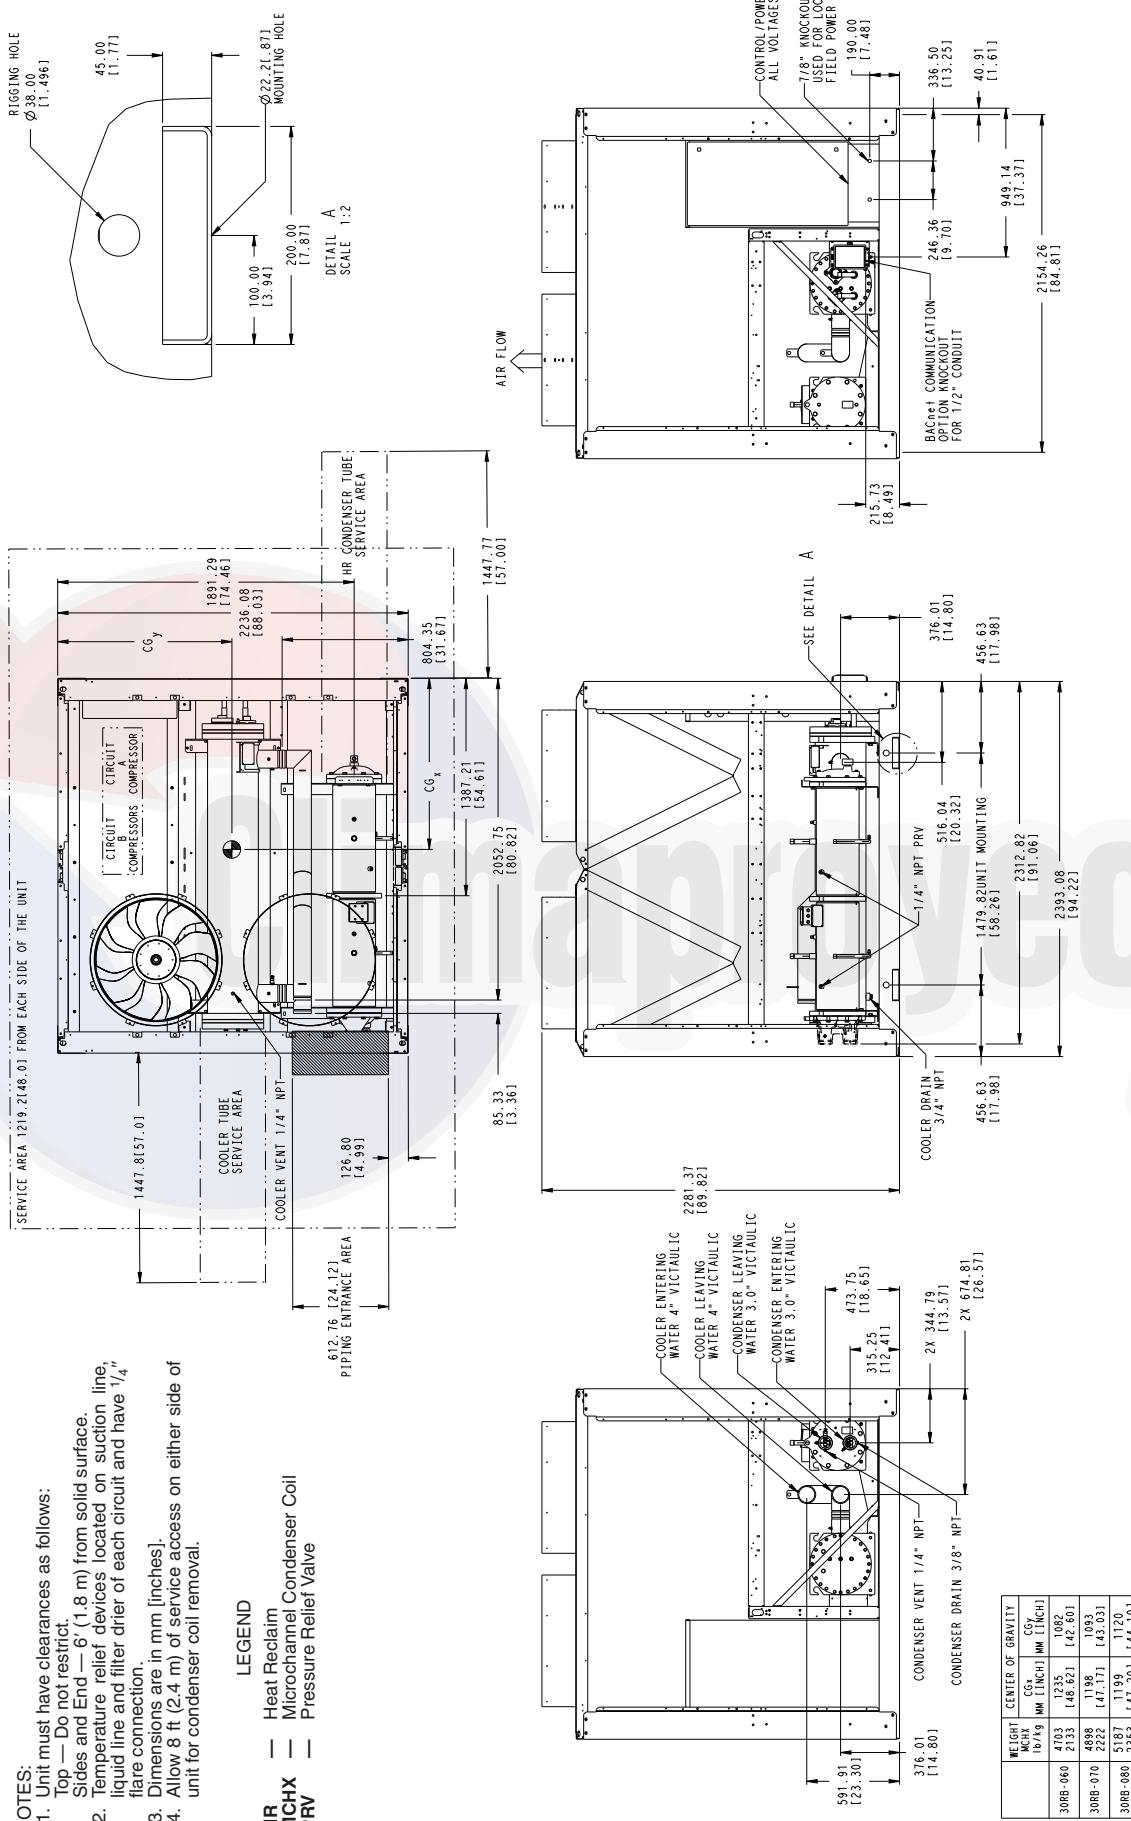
30RB060-080 Air-Cooled Chiller with Heat Reclaim Option Dimensions
